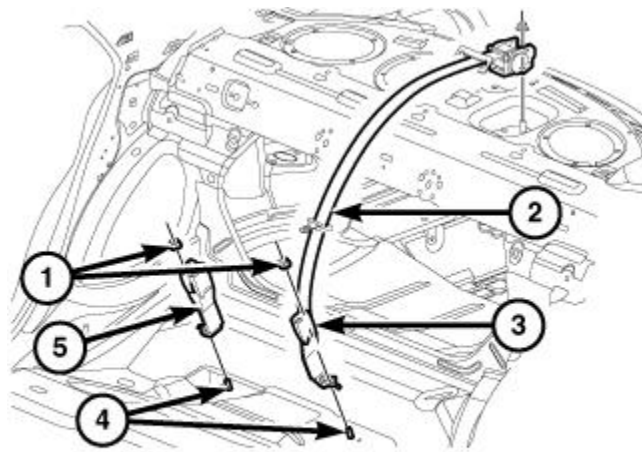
Center Rear Seating Position Buckles, Left Outboard Rear Seating Position Buckle & Center Rear Seating Position Seat Belt And Retractor
